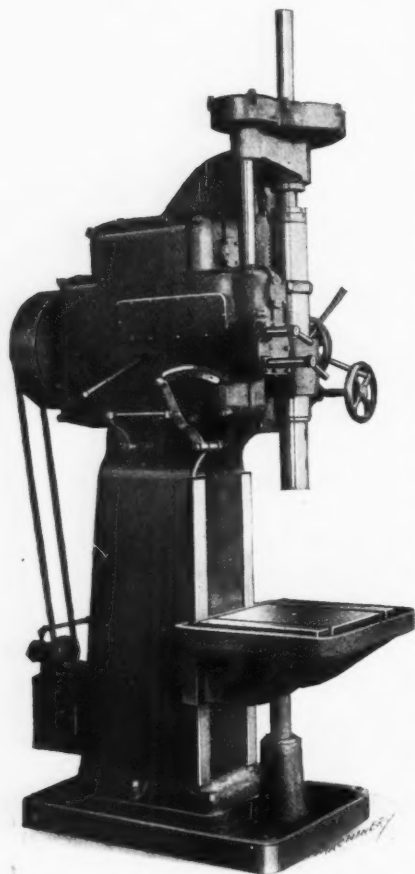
Pawling & Harnischfeger Heavy-duty Upright Drill
